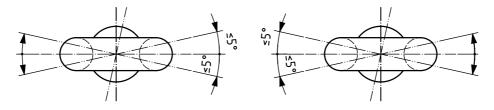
Plane view of alignment of eyebolts when used in pairs
